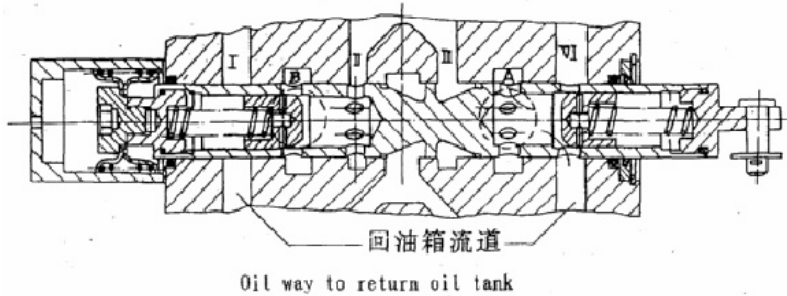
The inclining position backward of slide valve for bucket
